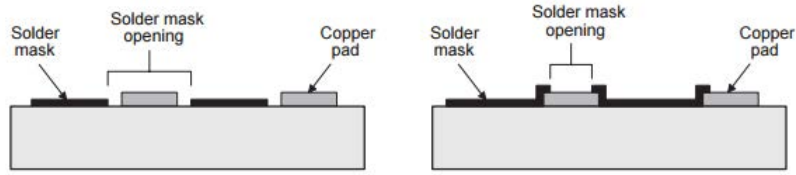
Cross sectional view of NSMD and SMD pads [15].
